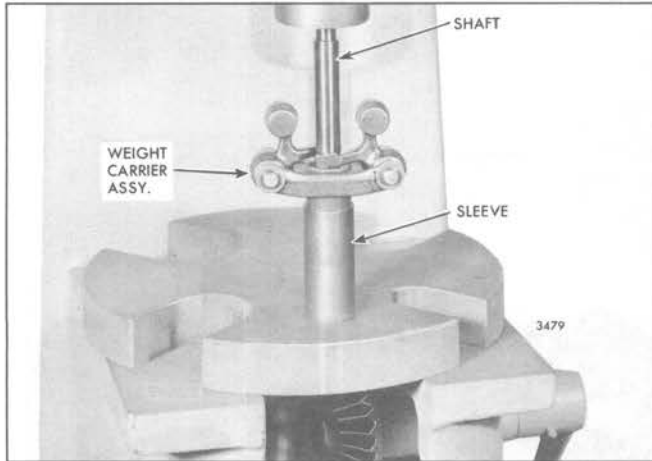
Removing Governor Weight Shaft from Weight Carrier Assembly
